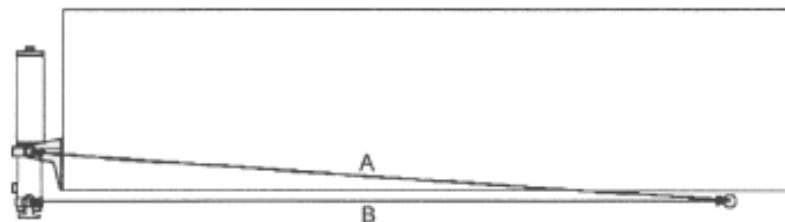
Suspension tube type cylinder mounting (dimensions to pin centerlines)
